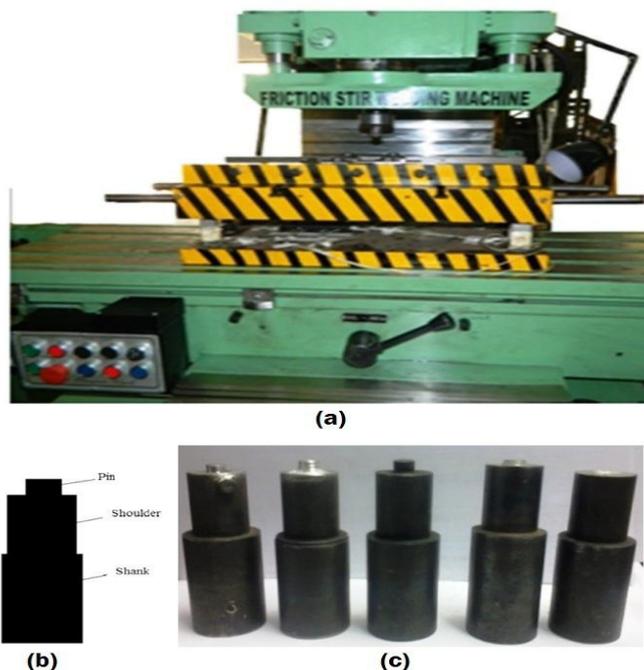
(a) Photograph of Friction stir welding machine; (b) Designed tool geometry; (c) Various tool made for friction stir processing for Al-17%Si cast alloy .
